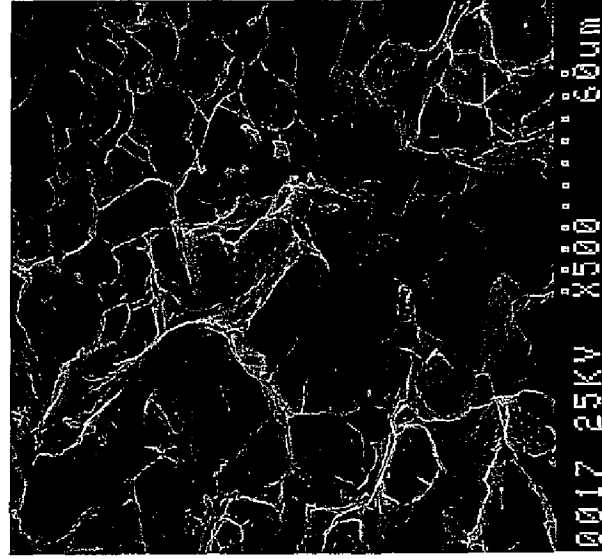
SEM fractography of specimen 1A-1, near fracture origin.
